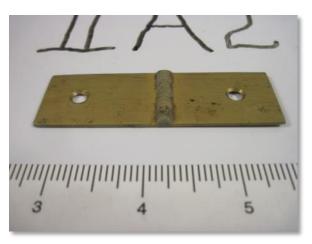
Z alloy 1-inch by 3-inch coupon with weld.
